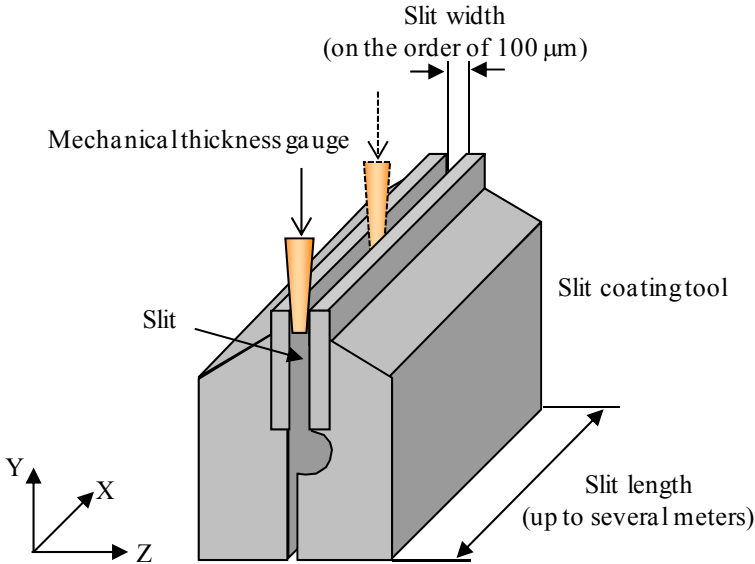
The coating tool with a long slit and the conventional measurement method using a mechanical thickness gauge
